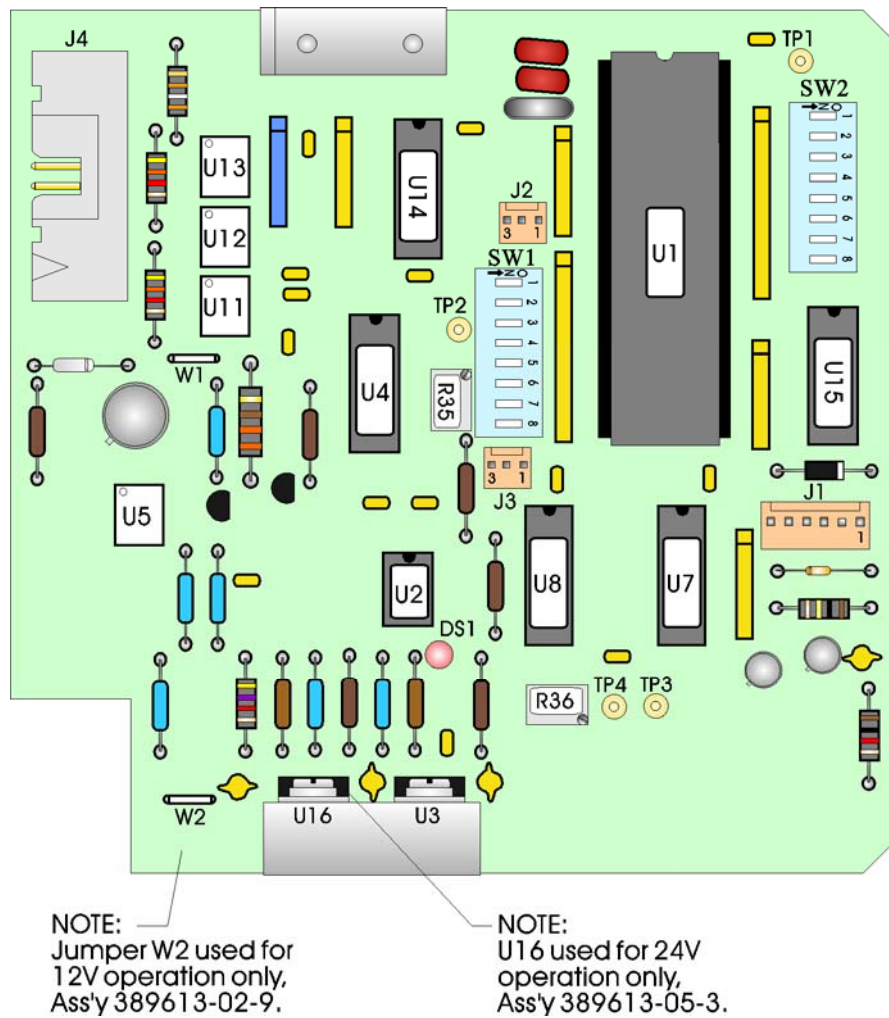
C-19 - Assembly, Raise/Lower Type CPU Board with PDM Output
